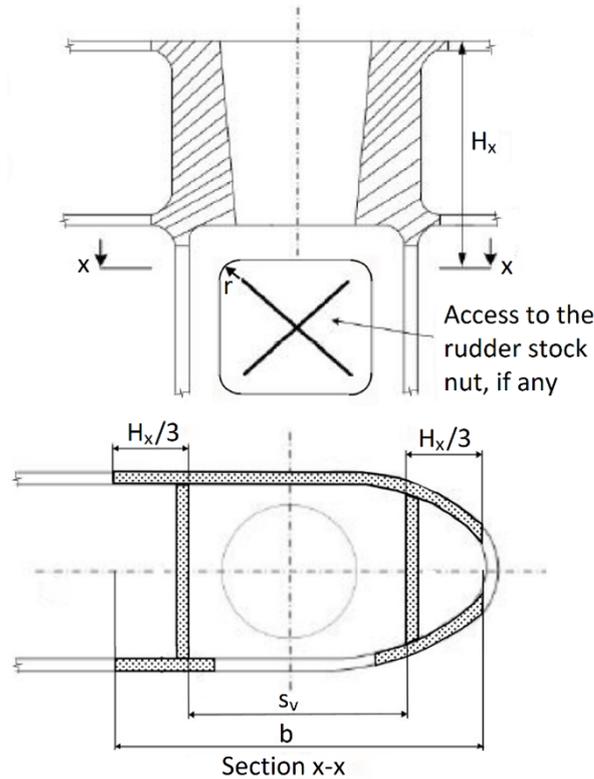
Cross-section of the connection between rudder blade structure and rudder stock housing, example with opening in only one side shown
